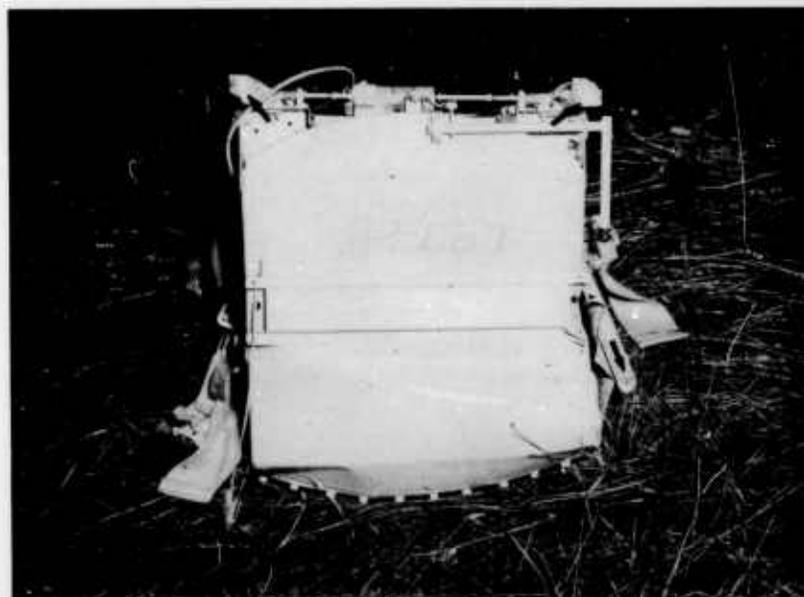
Bottom view of seat pan - pilot. The dotted line indicates bent seat pan lip and popped rivets on the right seat. Arrows show locations of seat support failures.
